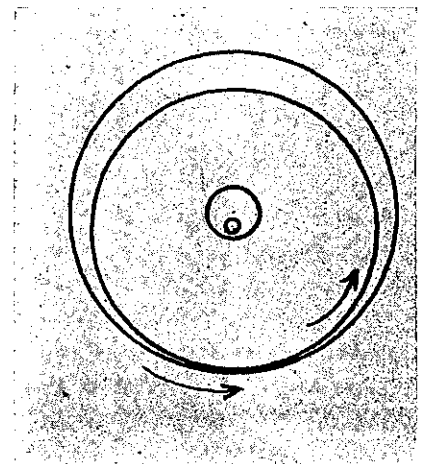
The next stage, when extraneous abutments (such as shown by the rollers Fig. 2) are dispensed with, the shaft passing through bearings eccentric to the bearings for the outer drum. It should be stated here that this outer drum revolves in the same direction as the inner wheel or motor. For instance, if a wheel is running on a road or railway, the road or railway may be considered as running in the same direction as the wheel, see sketch (Fig. 4). In the engine the rail or road becomes circular and therefore endless as shown by sketch (Fig. 5).
